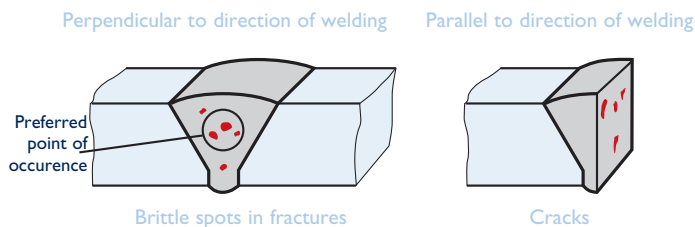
Appearance of hydrogen damage in the weld metal
